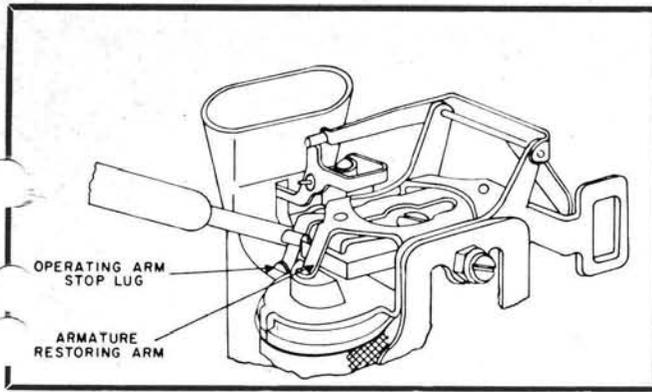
Adjusting coin relay operating arm stop lug for proper clearance.
